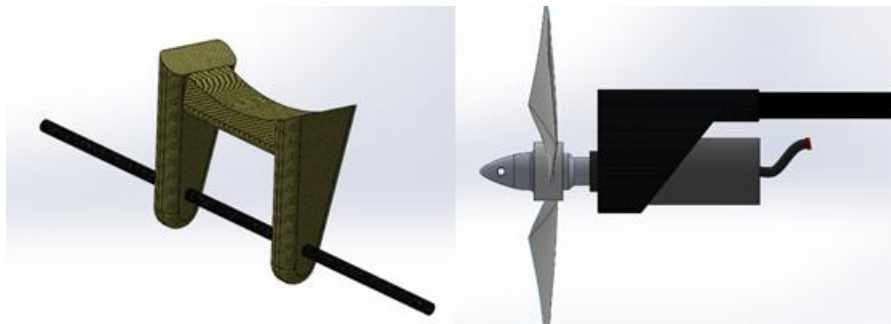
4 (Left) Landing Gear, (Right) Motor Mount
